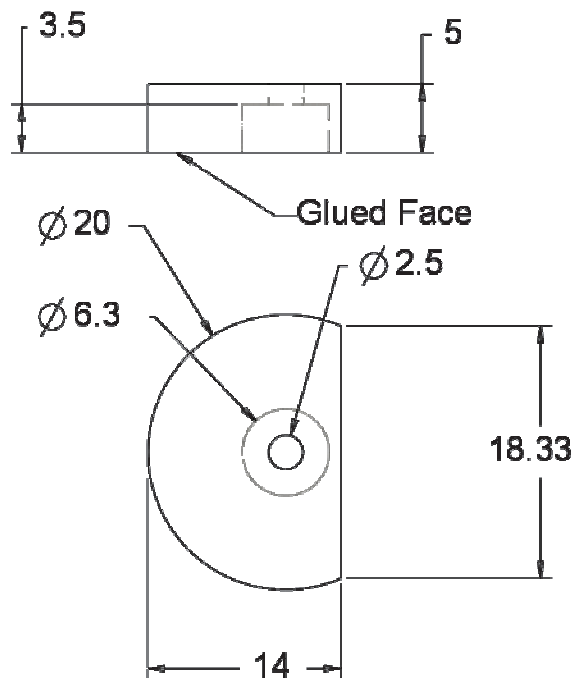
Geometry of aluminum pads stuck on pigs' skin for in-vivo tensile tests.
